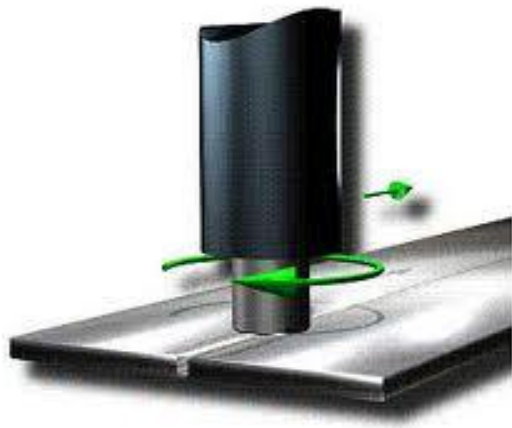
Schematic diagram of friction stir welding [4]
